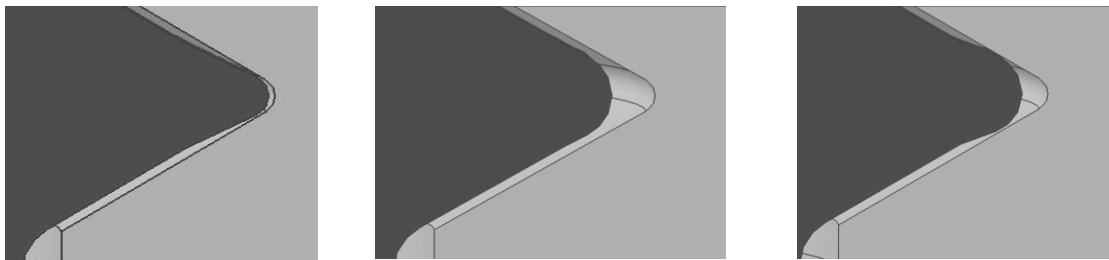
Novel thread form applied to ISO metric bolt thread
